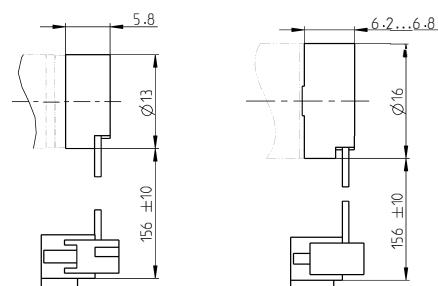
ENX 13/16 IMR – Dimensional drawing [mm]
